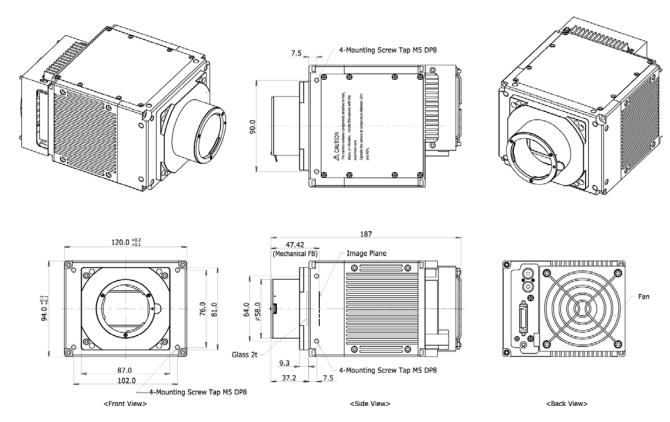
VNP Camera Link Mechanical Dimension (F-Mount)
